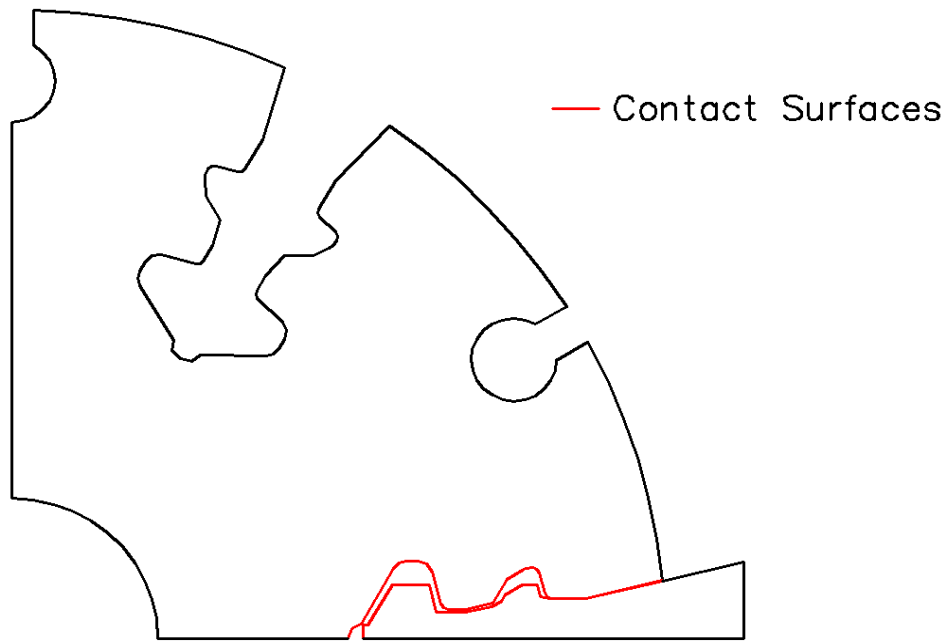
Geometrica® 6Sd-00 Jointing System Contact Surfaces
